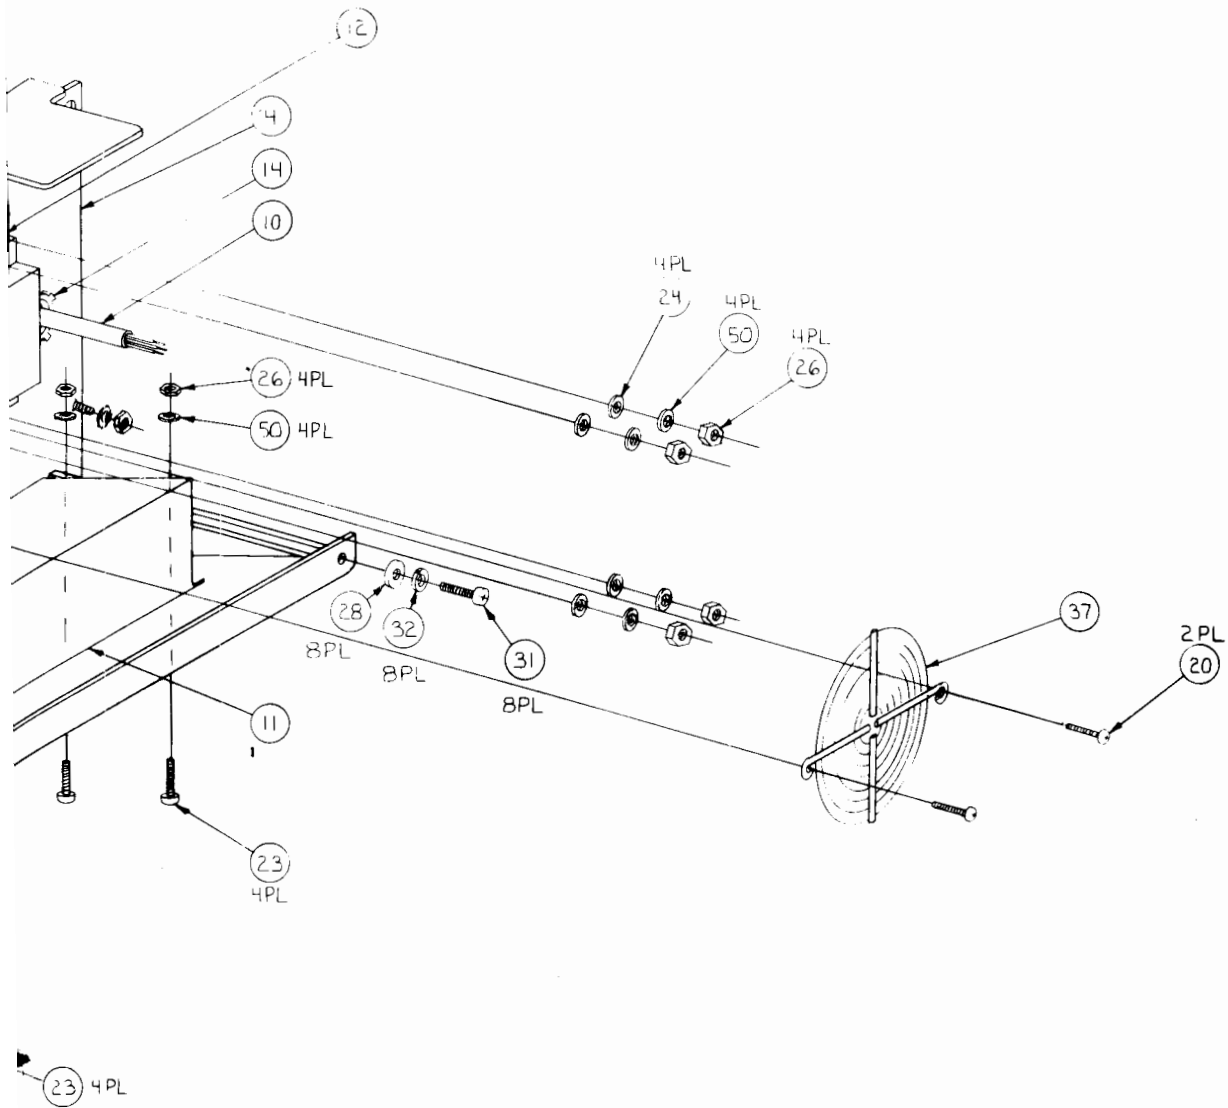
Power Distribution Assembly (07976-60019), Exploded View
